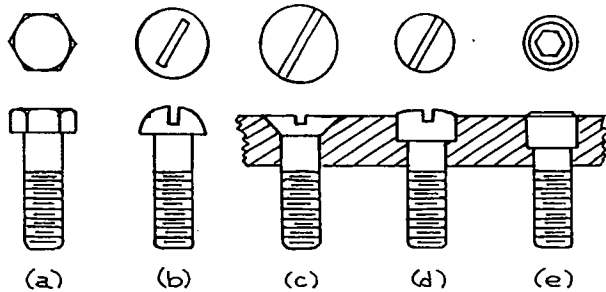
Common machine screws: (a) hex head; (b) round head; (c) flat head; (d) fillister head; (e) socket head.
